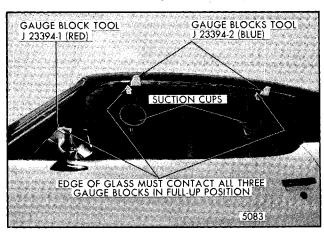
Door Window - Fore and Aft Alignment - F Styles
